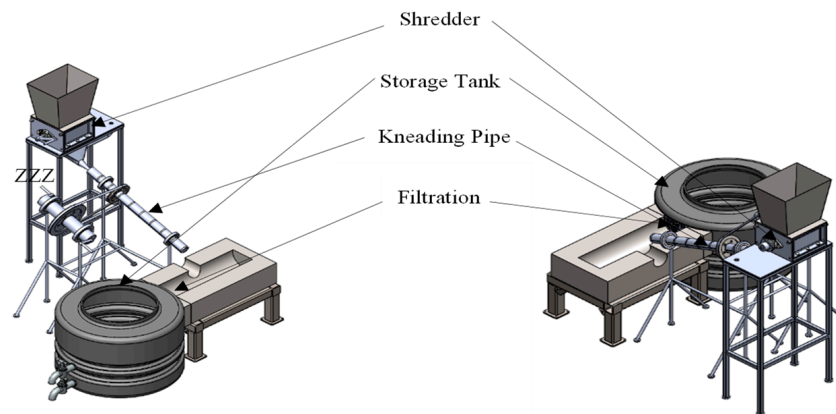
Three-dimensional manual sago extraction machine model (Isometric Views).
